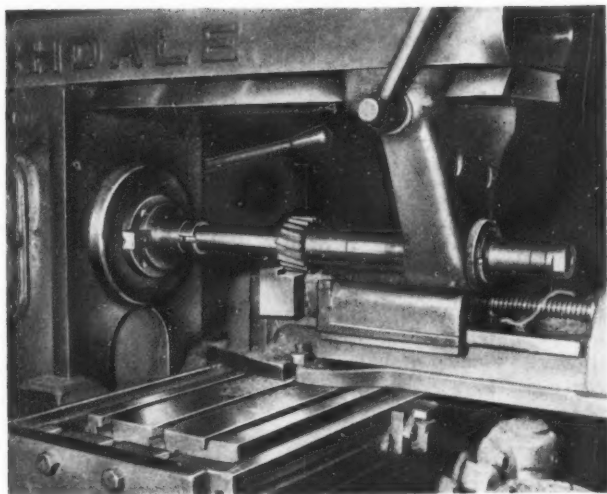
Typical set-up on a horizontal milling machine, utilizing the arbor seen at H in Fig. 1
